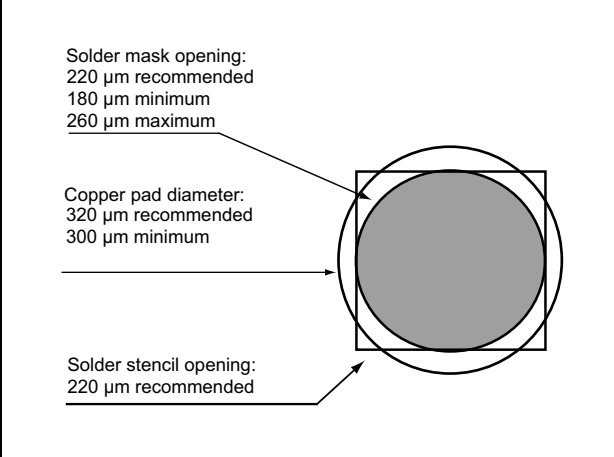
Footprint - 5 mils stencil - non solder mask defined
